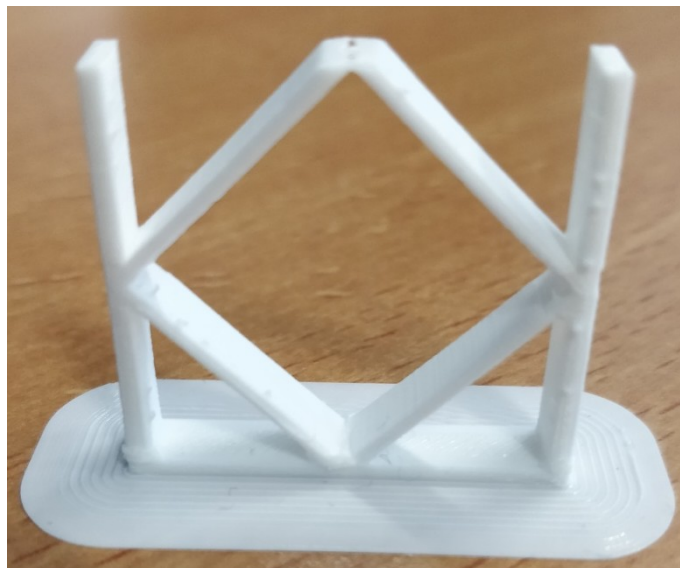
, Photograph of a successful test print using the Ultimaker3 printer.
